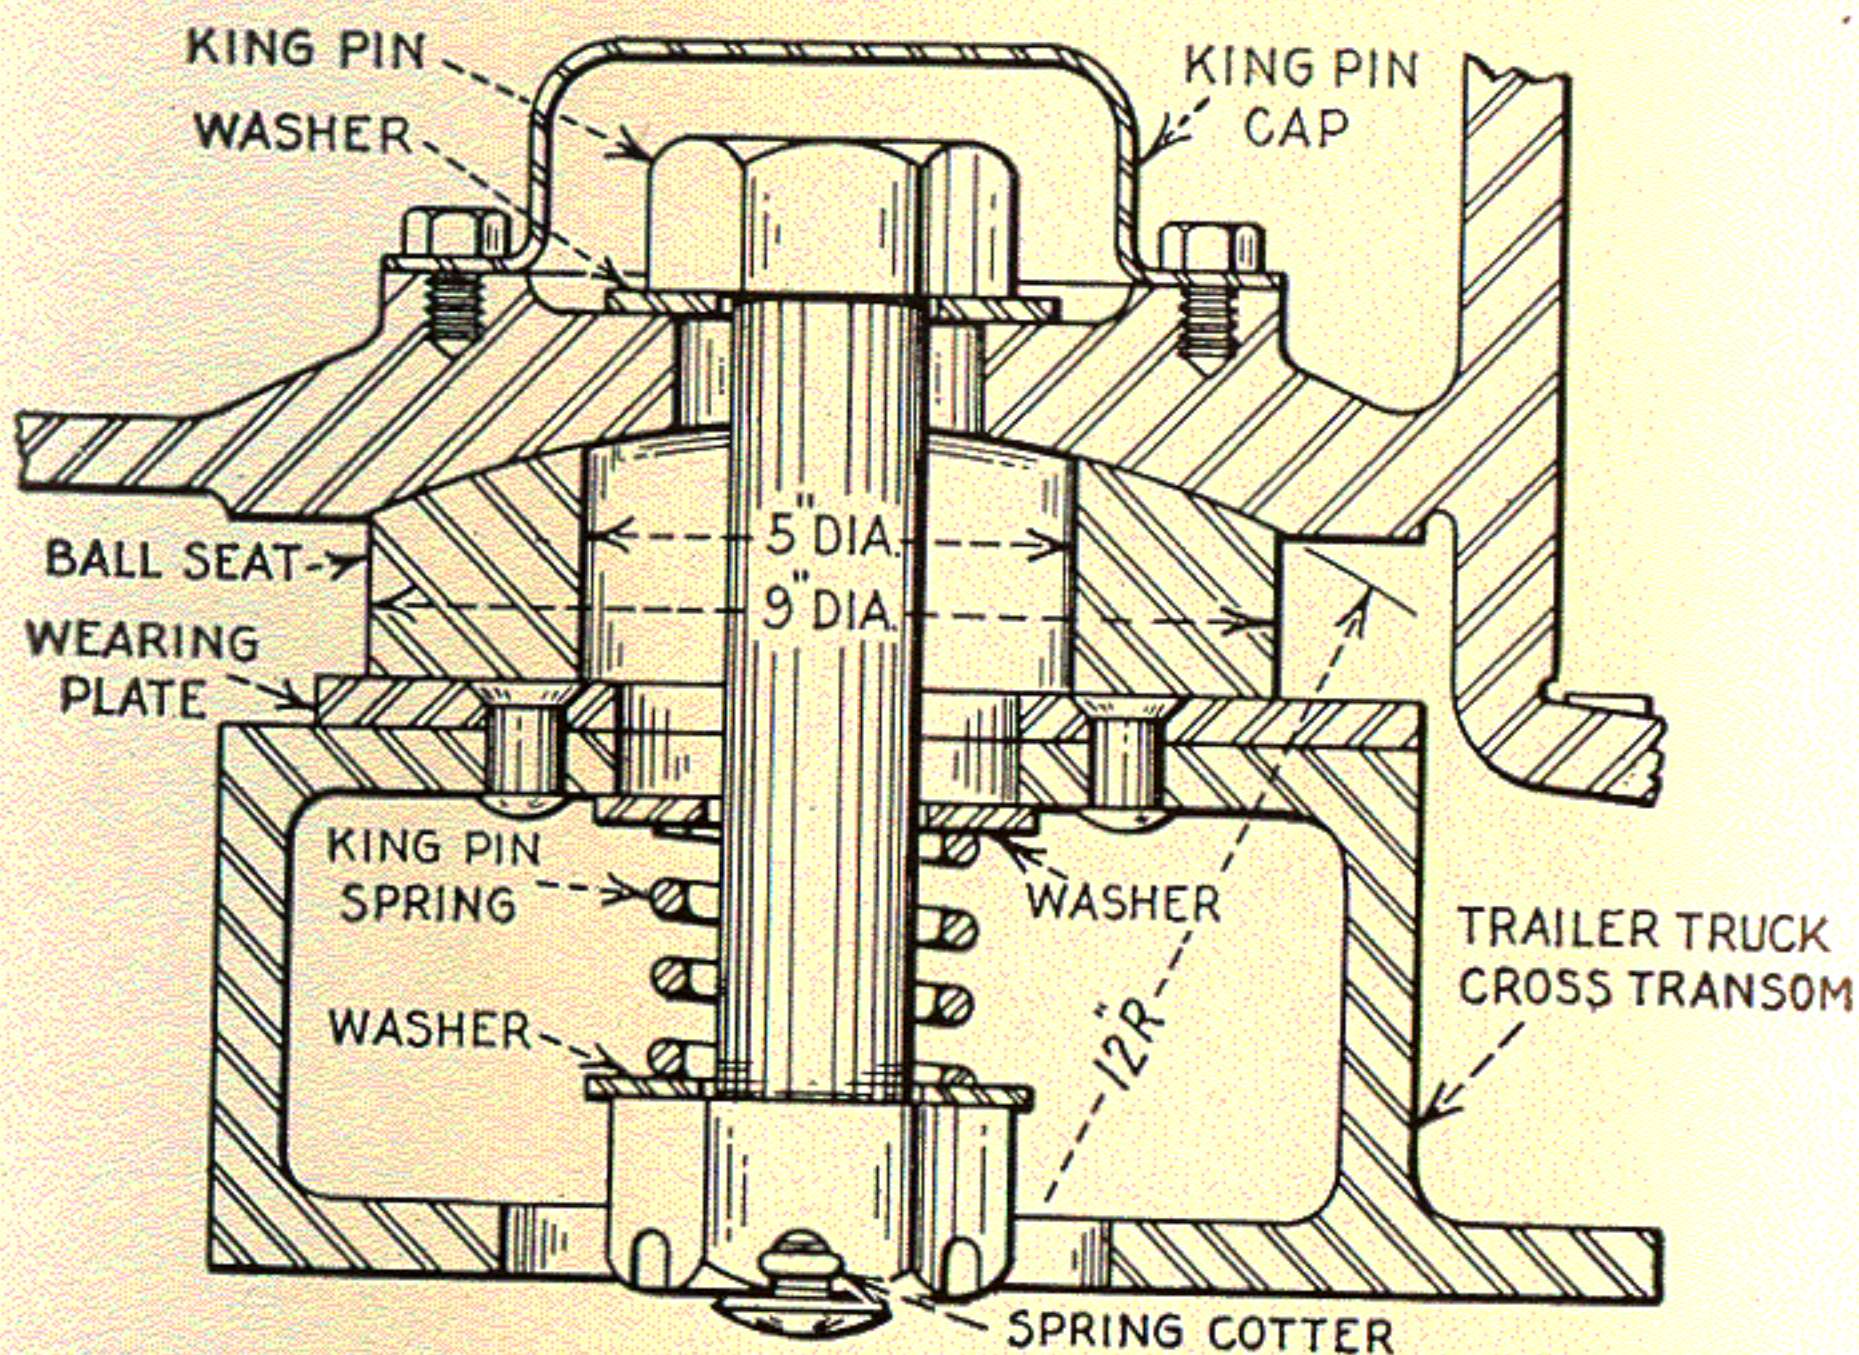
Type C-2 Booster Ball Seat Arrangement
